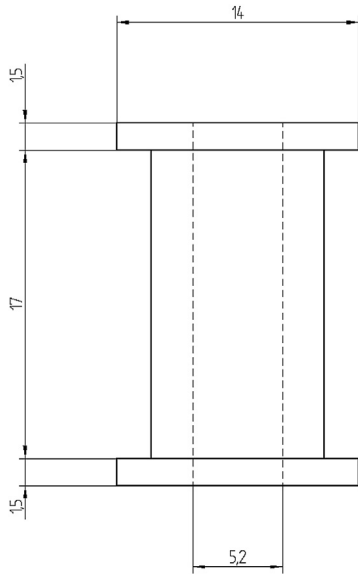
Insert geometric dimension used in FEM analysis (All dimensions in mm).
